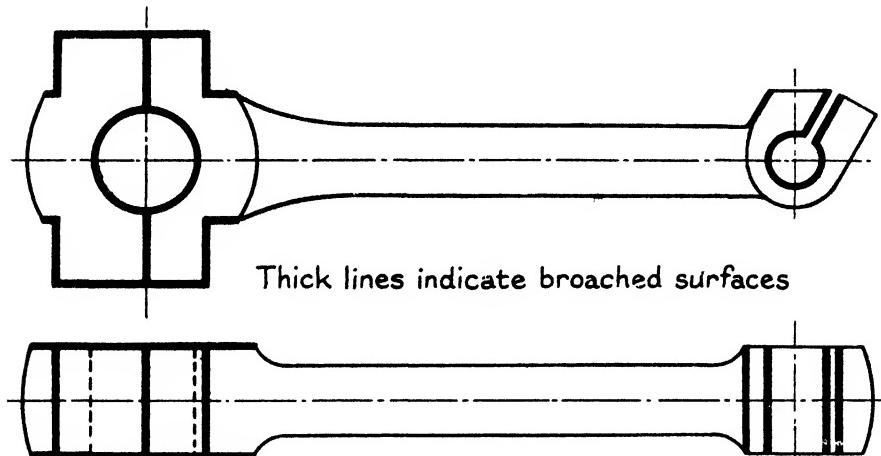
CONNECTING ROD SHOWING SURFACES FINISHED BY BROACHING
